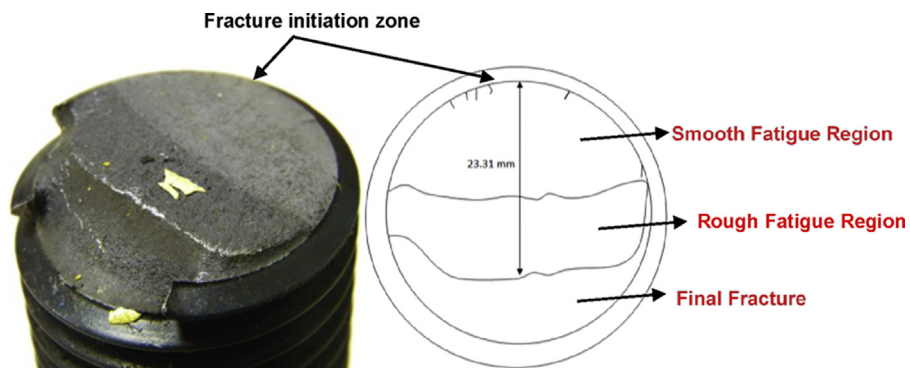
Macrograph and schematic of fracture surface of one of the bolts.
